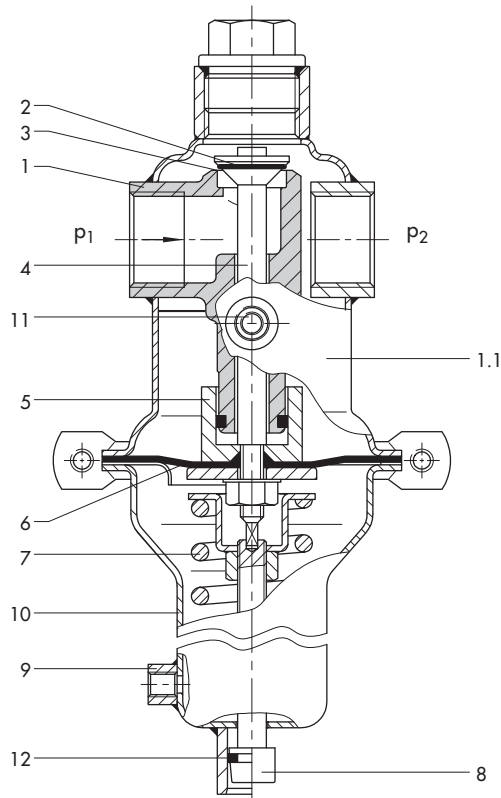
· Type M 44-2 Pressure Reducing Valve (K_{VS} 5 to 22)
